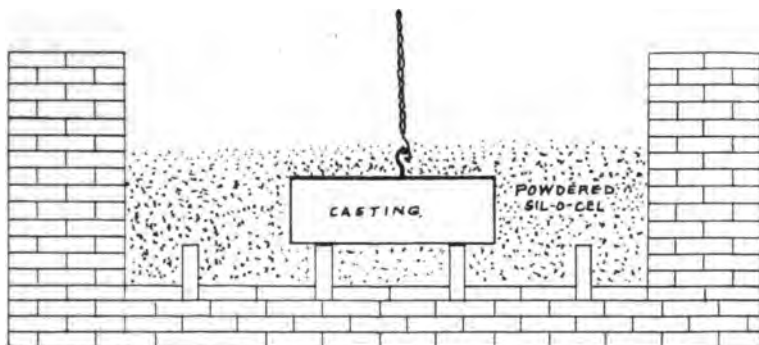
ANNEALING PIT CONTAINING POWDERED SIL-O-CEL FOR SLOW COOLING OF CASTINGS.
